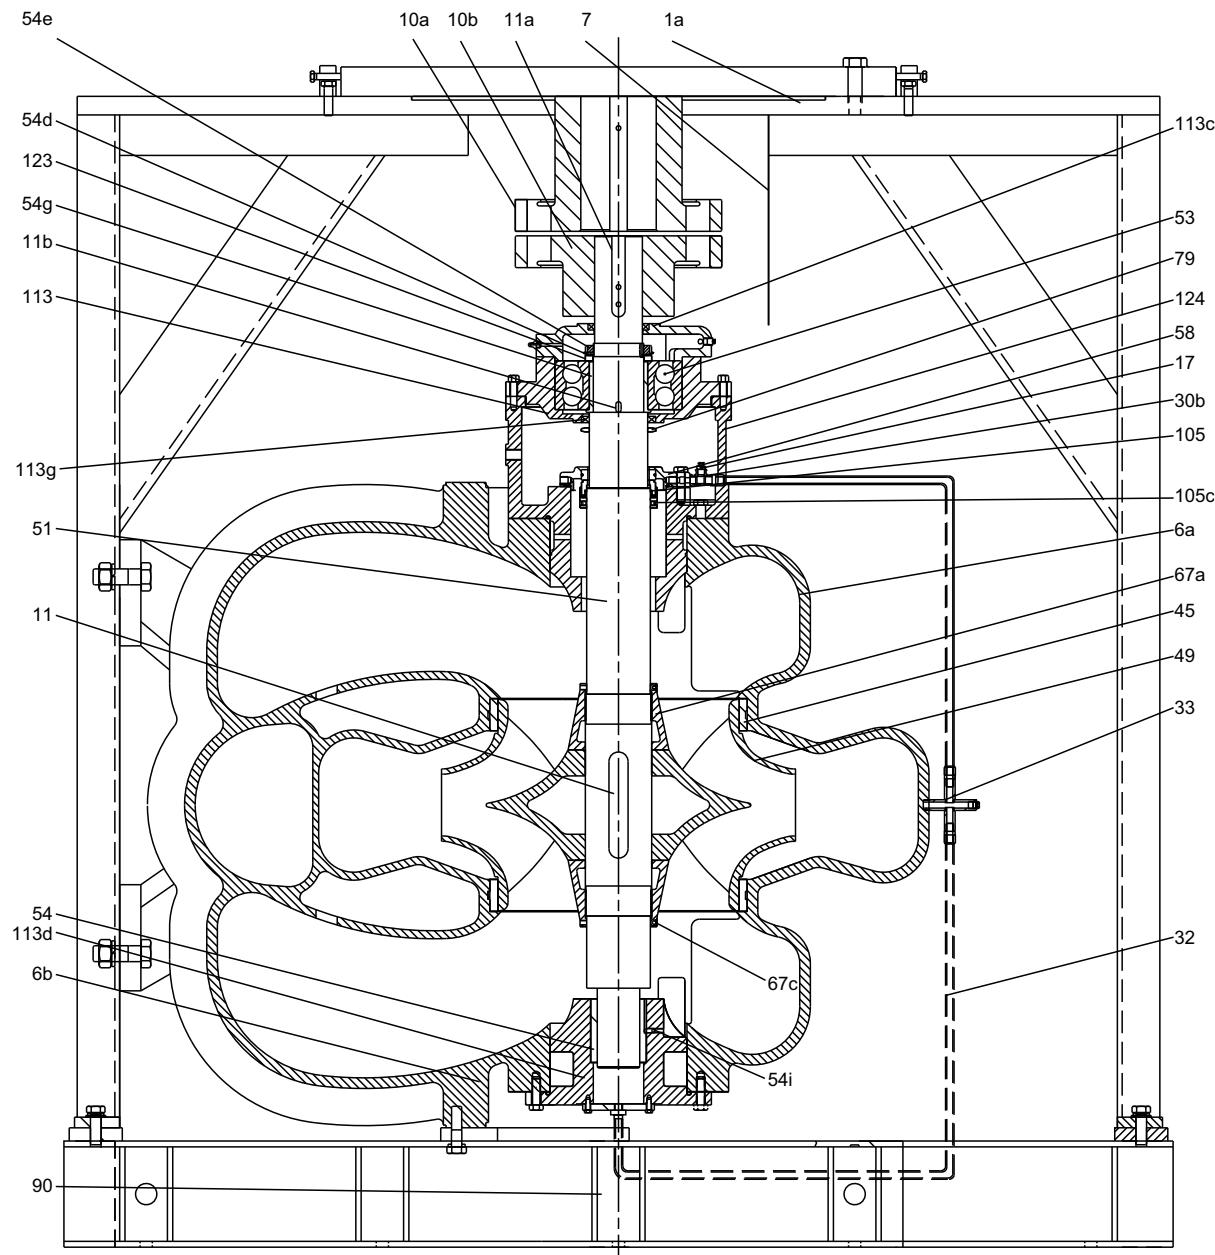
Sectional drawing, standard construction type 7, motor frame size from 280 to 315
